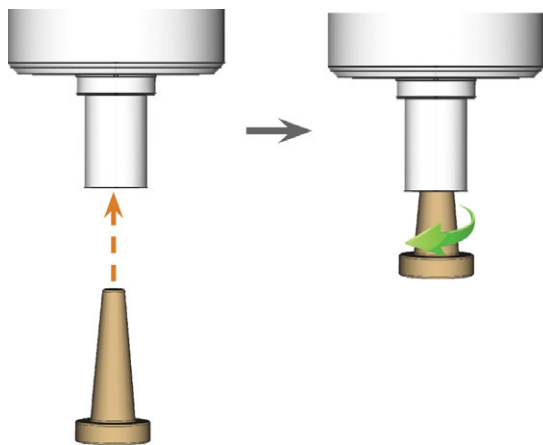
CLEANING THE INNER CONE OF THE SPINDLE
